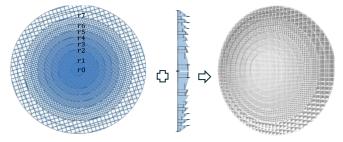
Fresnel Len made of concentric rings and angles designed in Fusion 360 Cad tool
